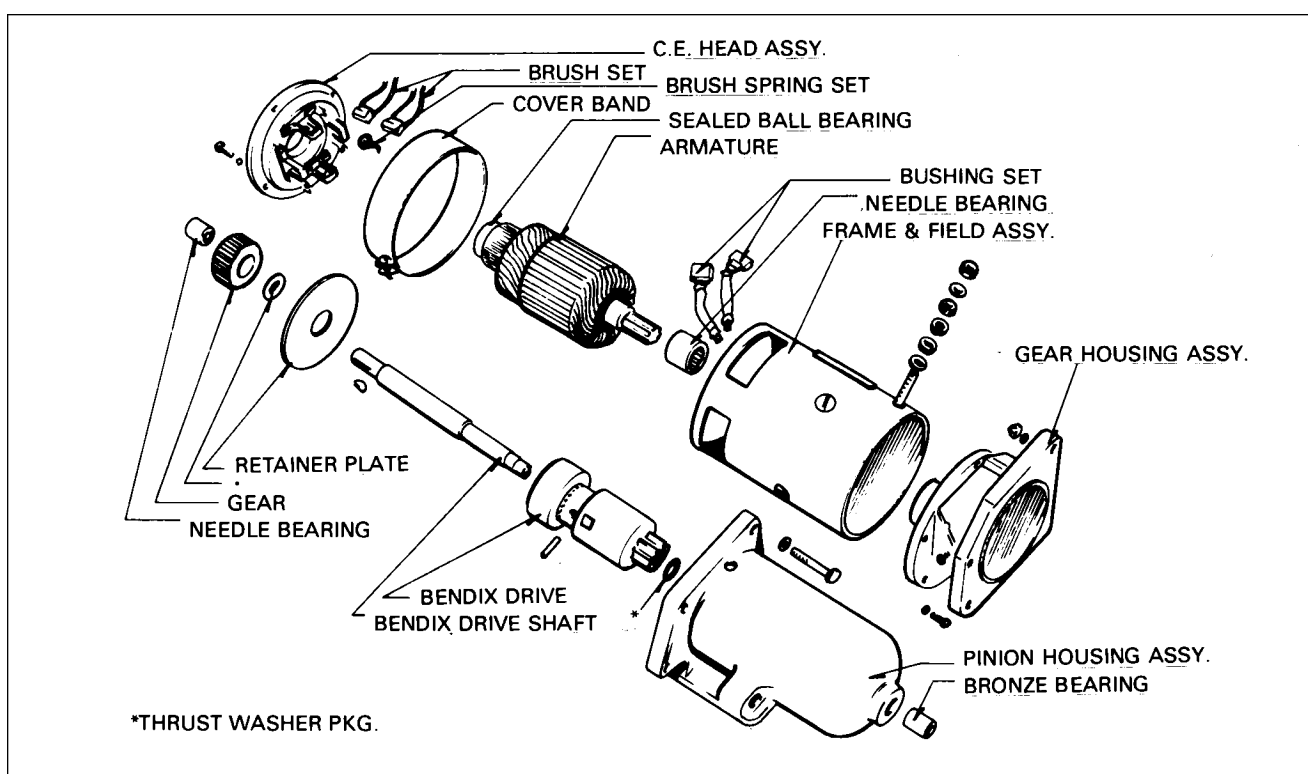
Exploded View of Gear Reduction Starting Motor
